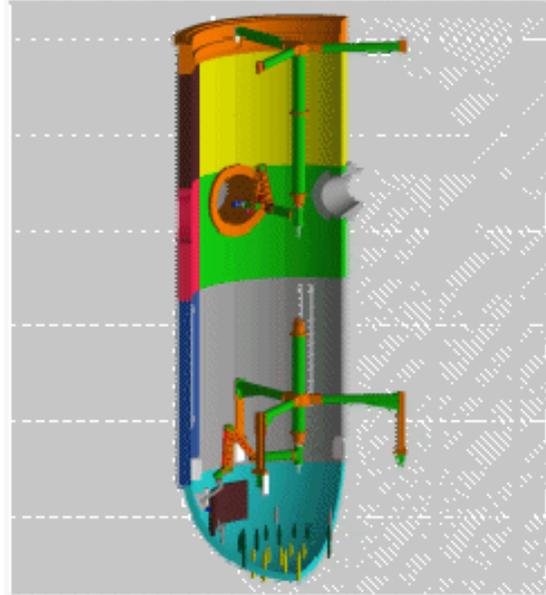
SUPREEM inspection system for PWR reactor vessel welds.
